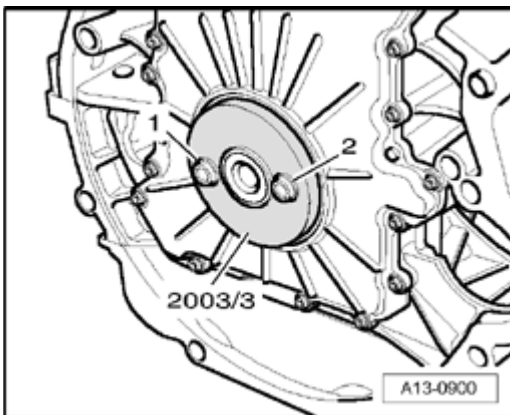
Pressing New Seal Into Drive Plate Up To Stop Using Seal Installer 2003/3 And Bolts
